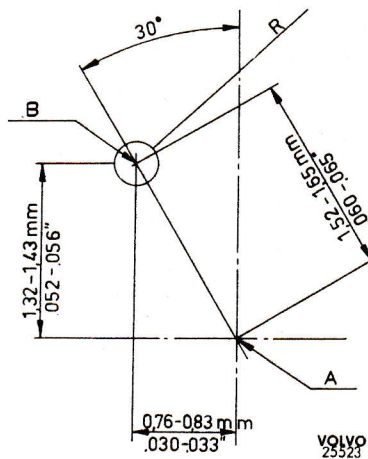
Eccentricity for rear brake linings on front wheels, riveted model.
